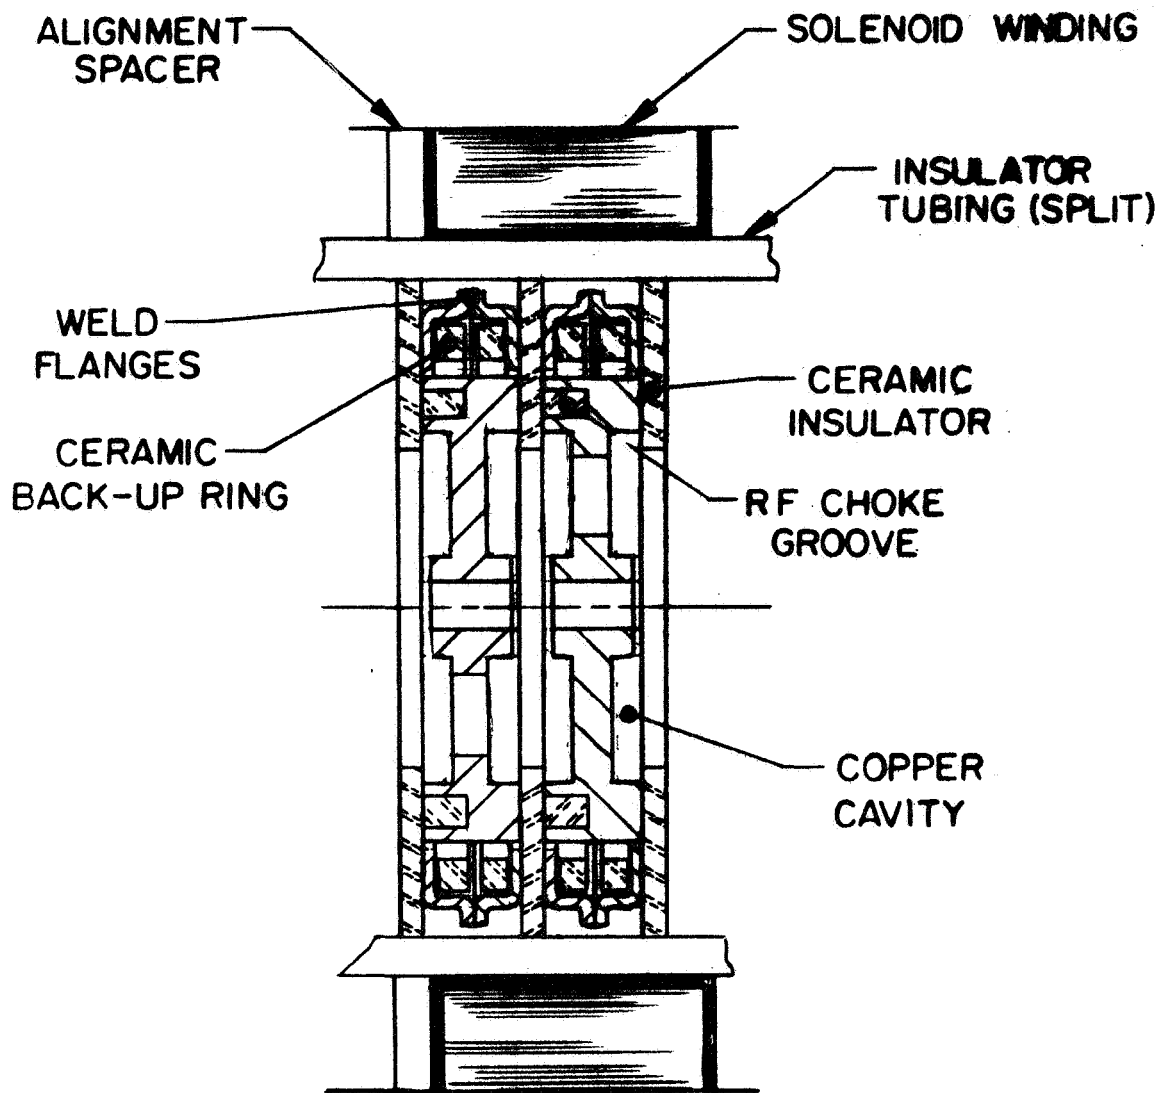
Voltage jump insulator assembly for solenoid focused tube.
